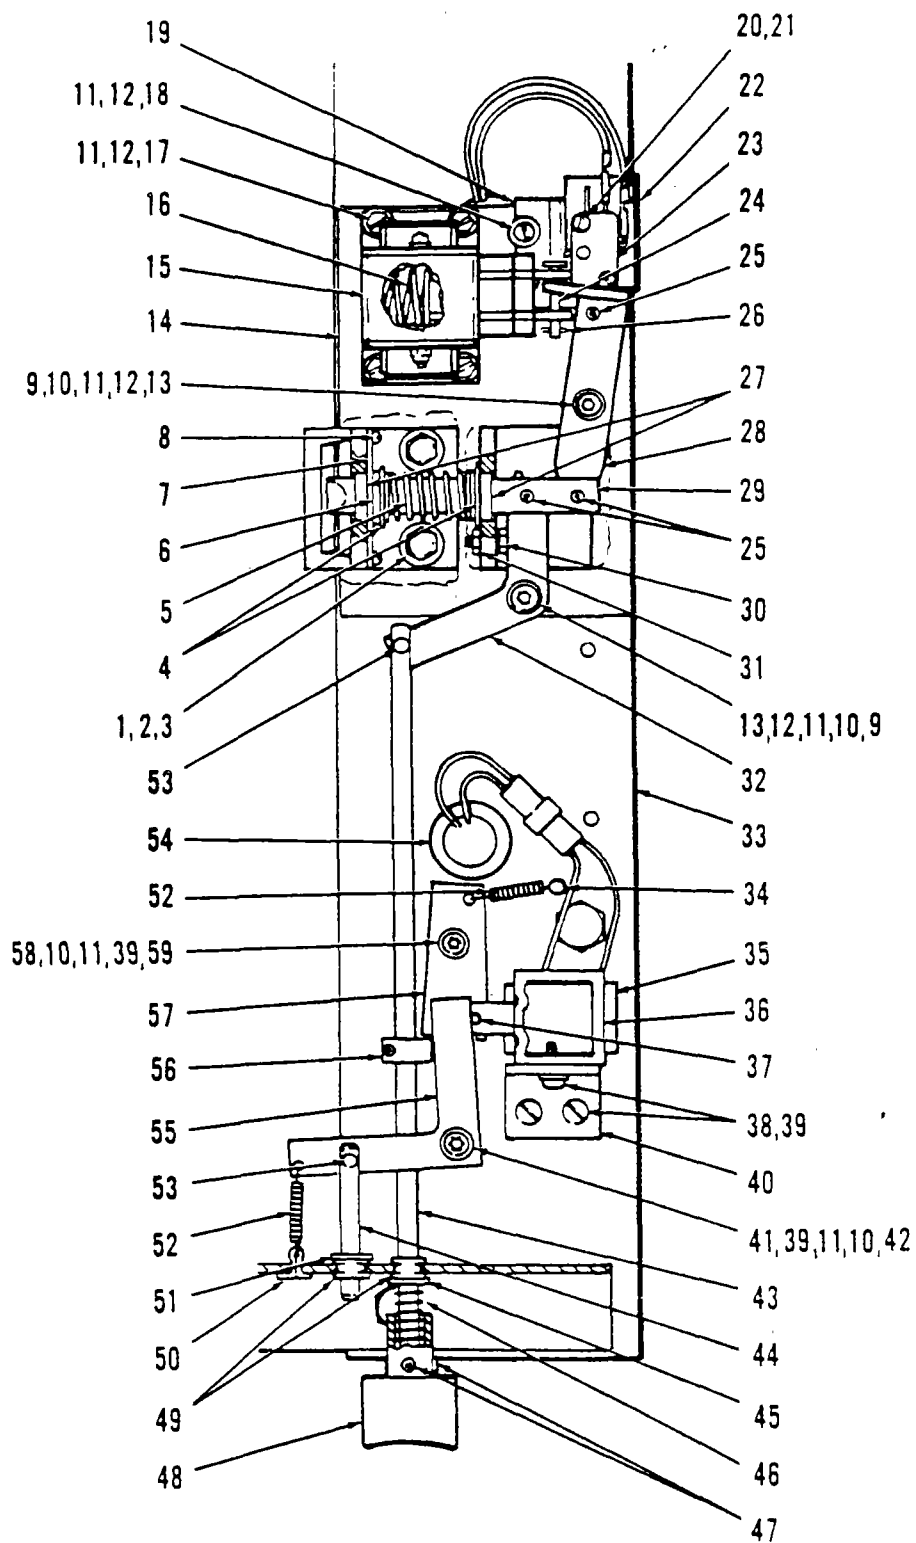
RC-5B PLUS Door Interlock Assembly (Part A)
